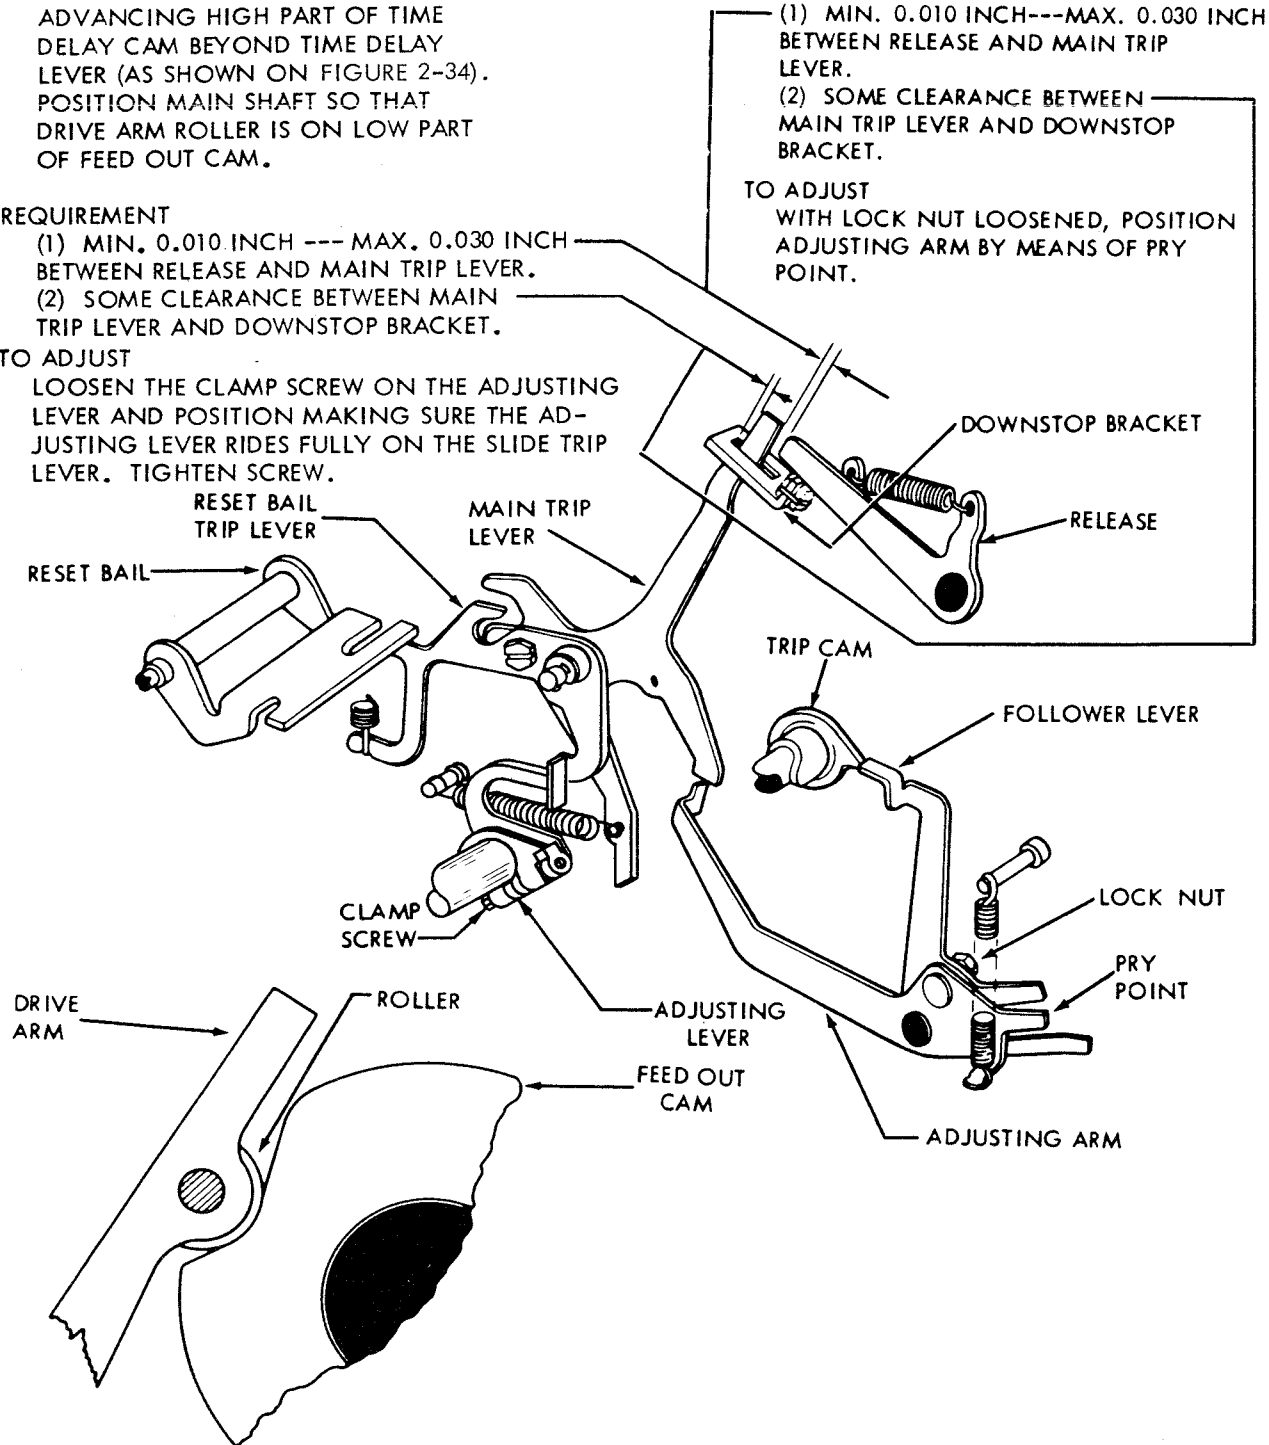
H. TYPING REPERFORATOR TT-375/UG, REMOTE CONTROL NON-INTERFERING BLANK TAPE FEED-OUT MECHANISM
